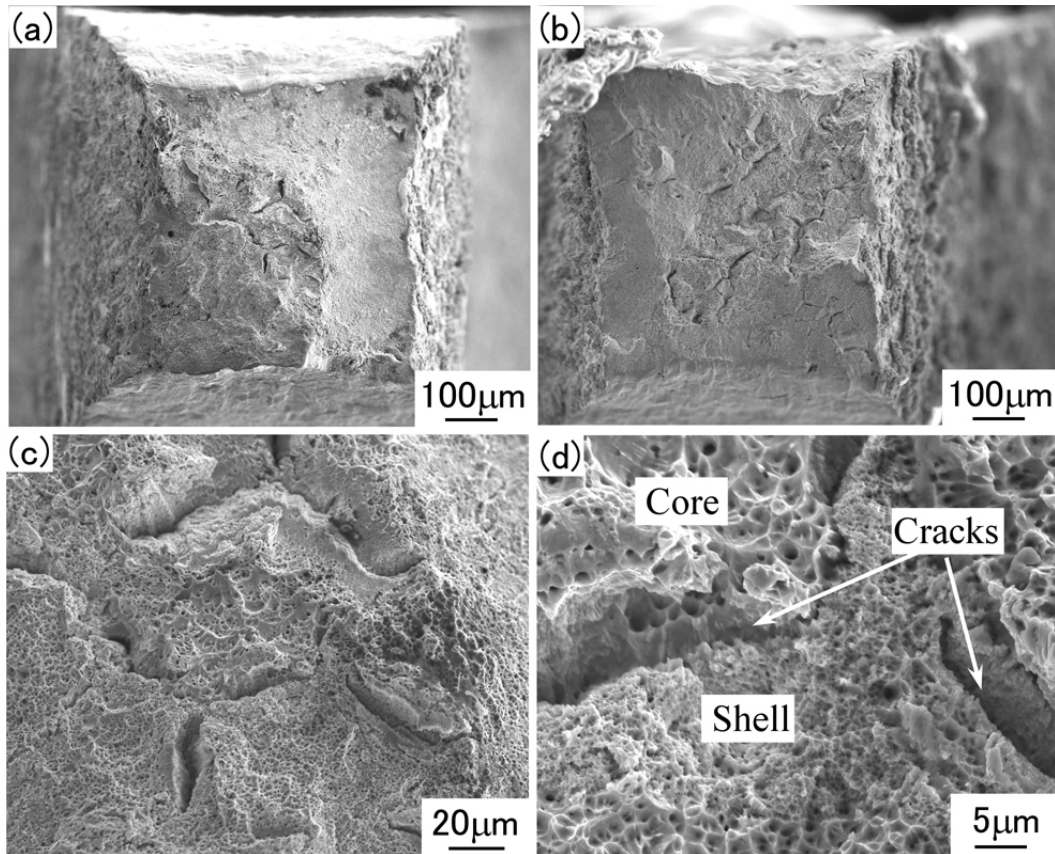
Morphology of fracture surfaces of bimodal structured SUS304L specimens: (a) Harmonic bimodal structure; (b) Heterogeneous bimodal structure; (c) Enlargement of cracks in Fig.5.12a; (d) Enlargement of cracks in Fig.5.12c.
